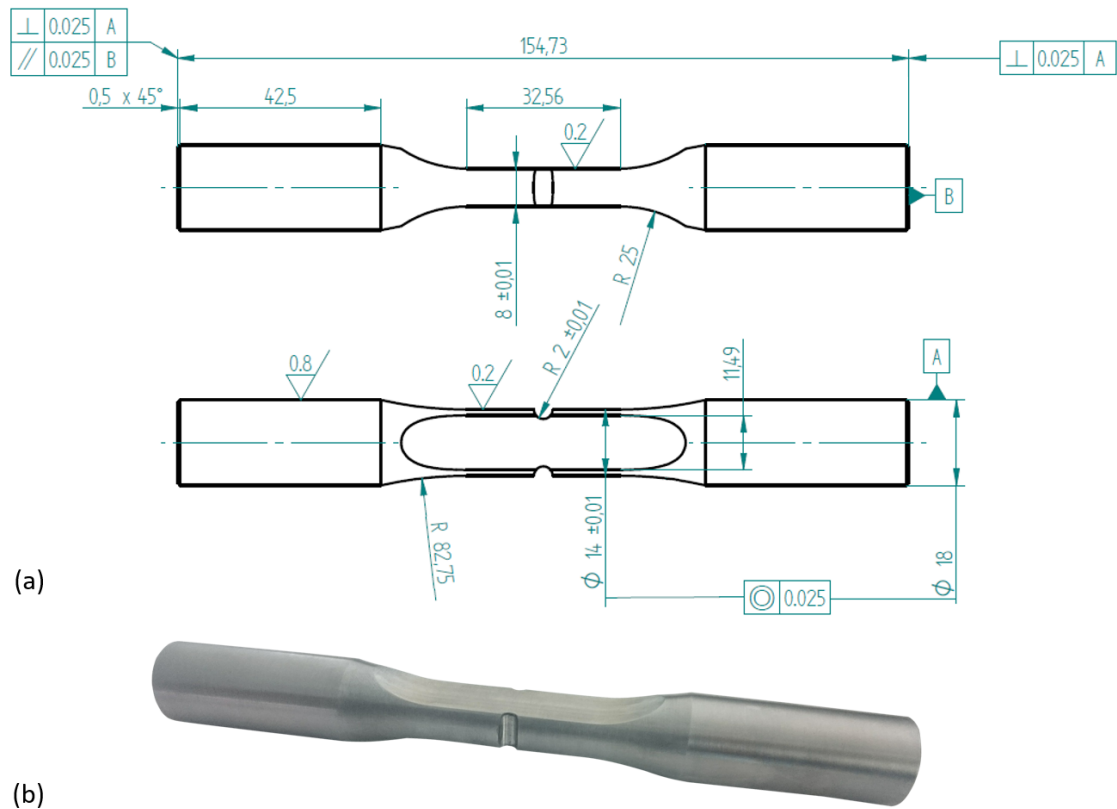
Notched part geometry: (a) technical drawing; (b) final part.
